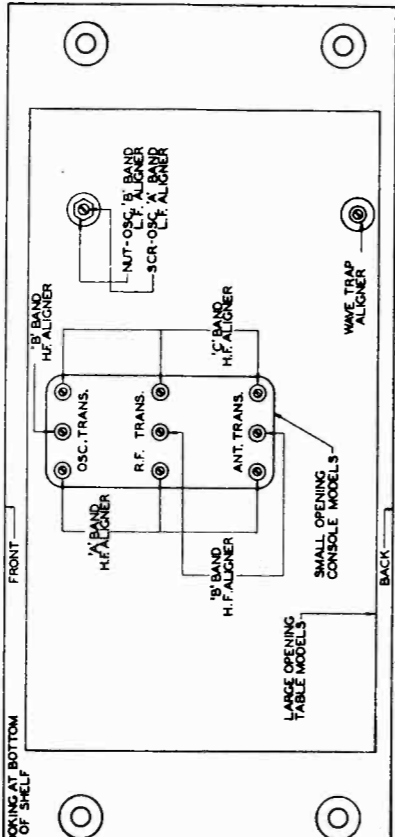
View Through Chassis Mounting Shelf Showing Adjusting Screws for R. F. Aligning Capacitors.
